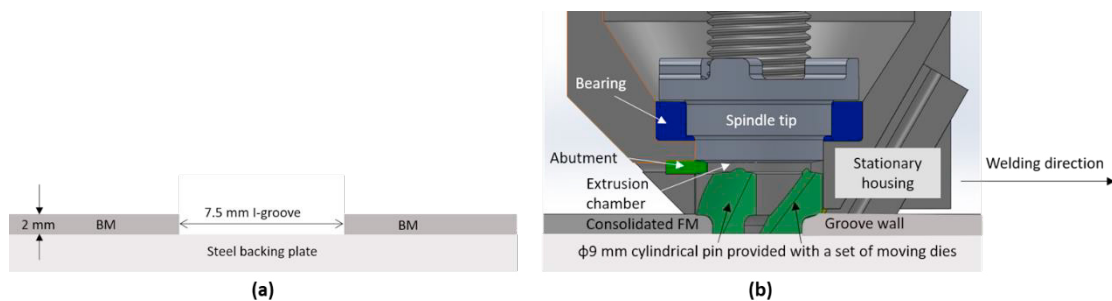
Schematic and SolidWorks drawings highlighting the experimental set-up during butt welding of the 2 mm thin AA6060-T6 extruded profiles; (a) Transverse section showing the groove and base plate dimensions. (b) Longitudinal section through the extruder head and the weld with the rotating cylindrical pin in position within the groove and the closed stationary housing placed on the top.
